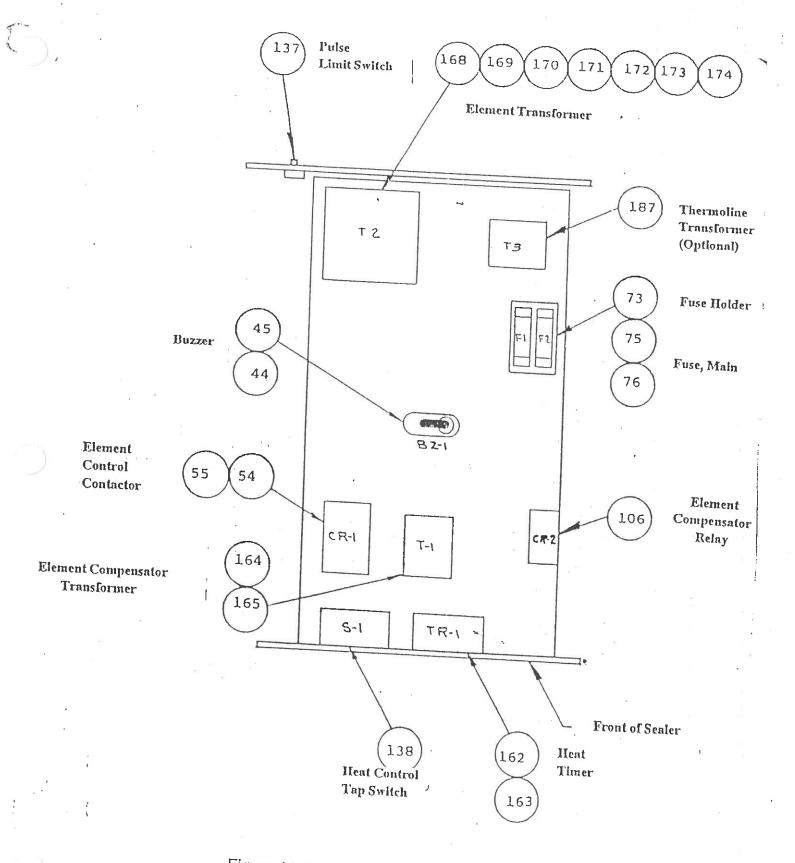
Parts Locations, Electrical Chassis Model 6100 Series
